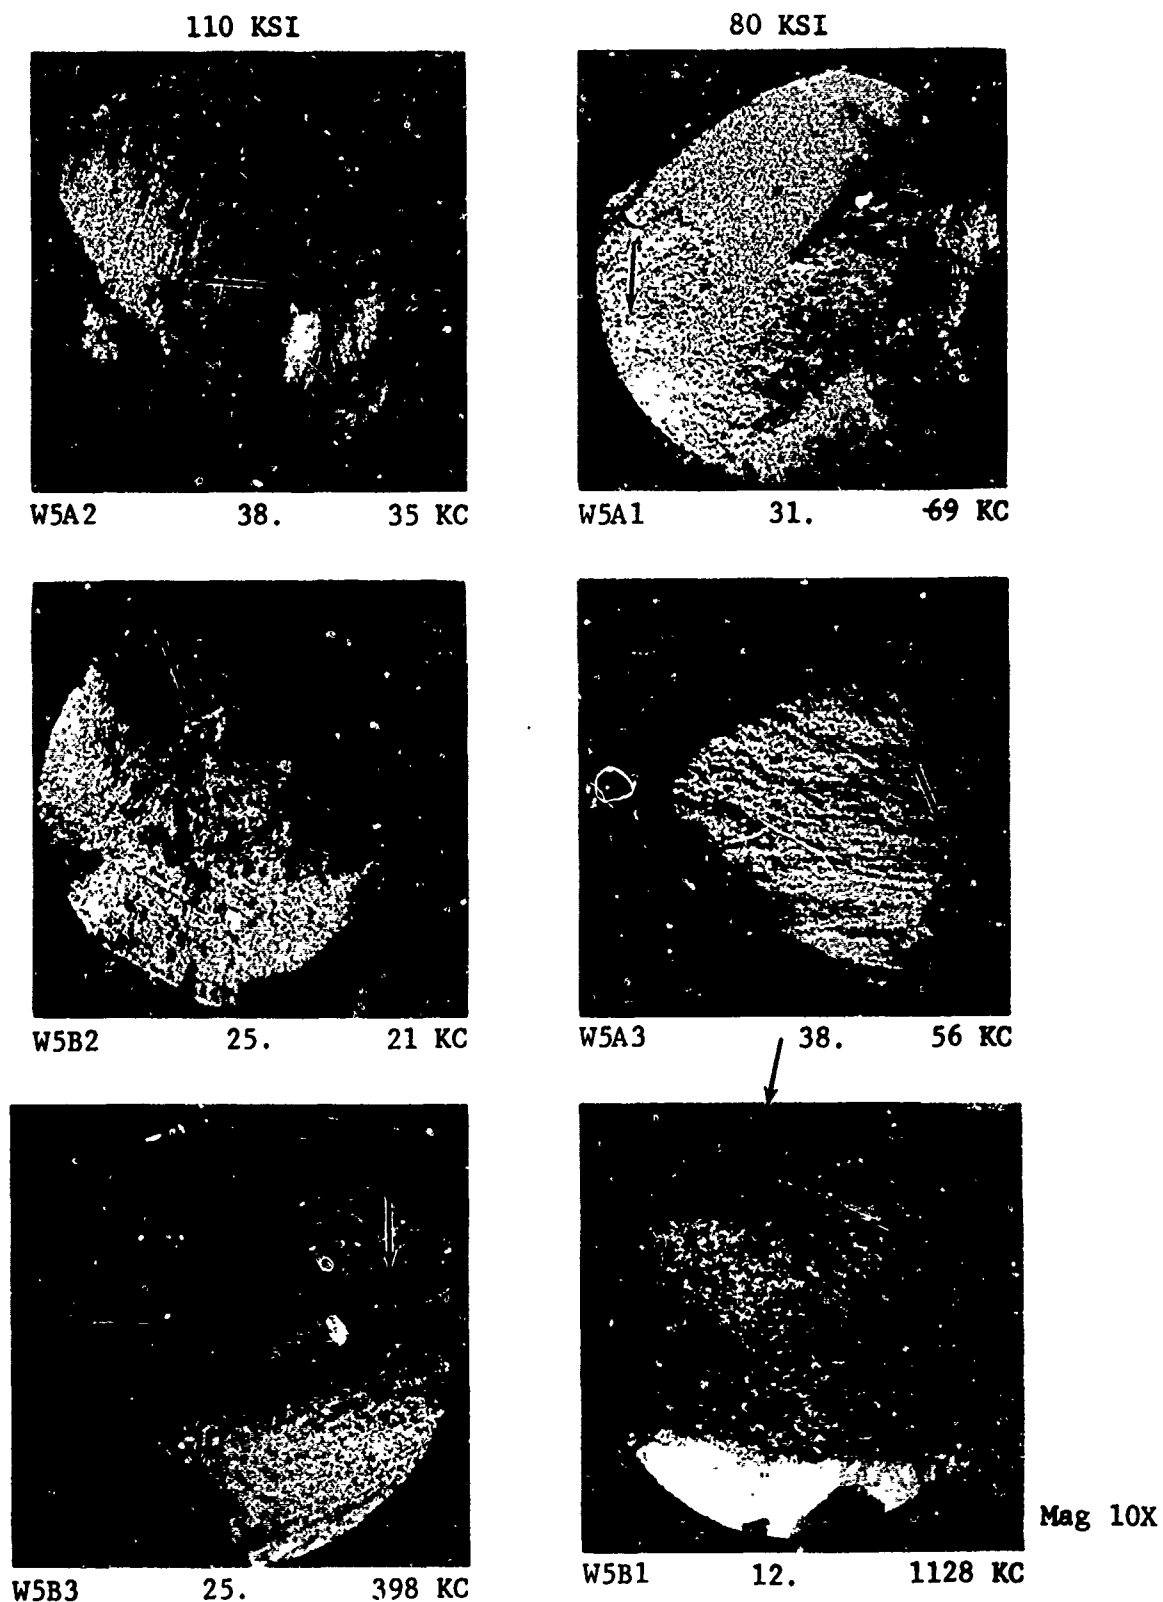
Fracture Surfaces of Failed Fatigue Specimens Series W5-Double-Bond/Two-Axis Diffusion Bonded with 304 S.S. Inclusion
